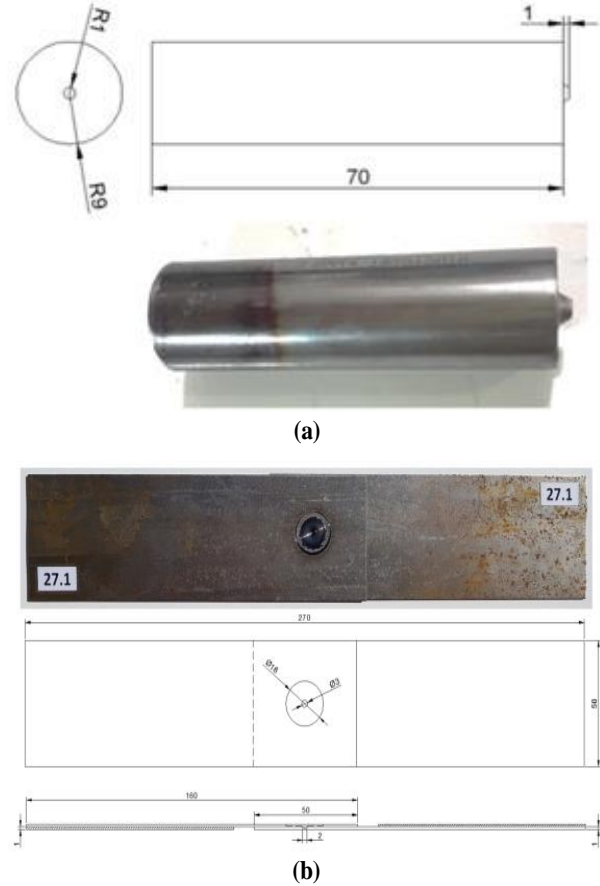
(a): The tool and its dimensions, and (b): a typical welded sample and its dimensions.
